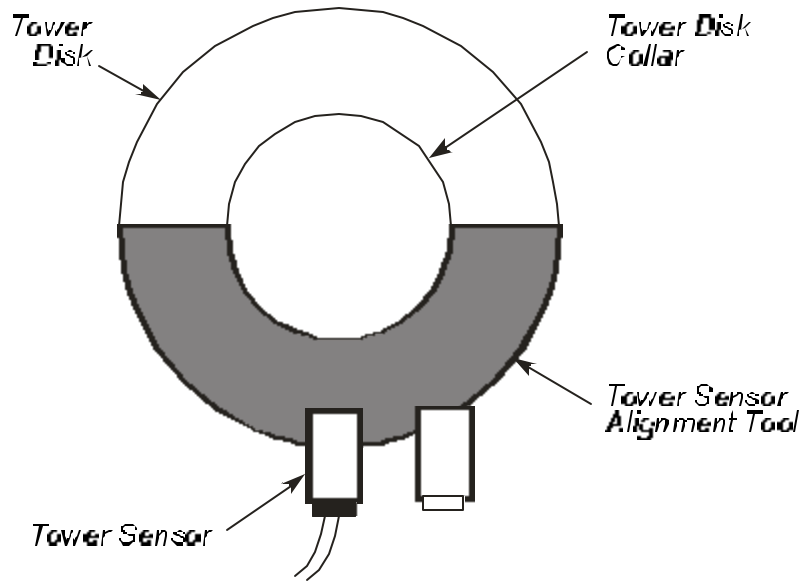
14 Using the Tower Sensor Alignment Tool.
